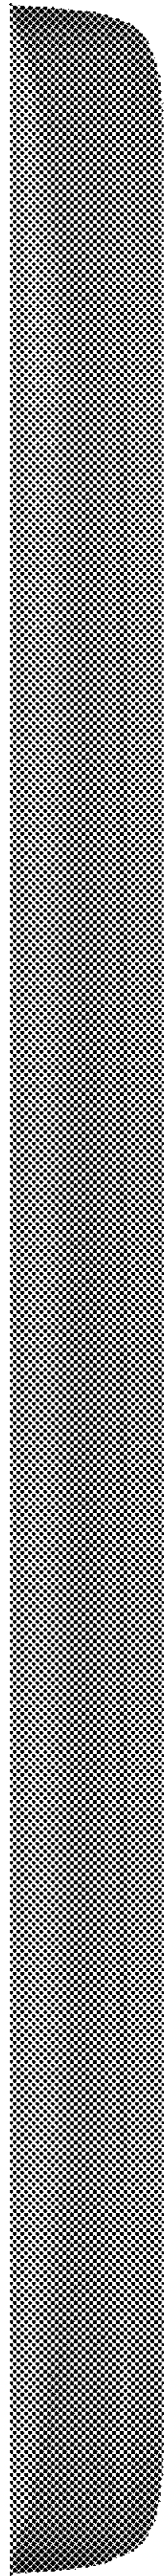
is a bottom plan view of the vehicle lower bumper
